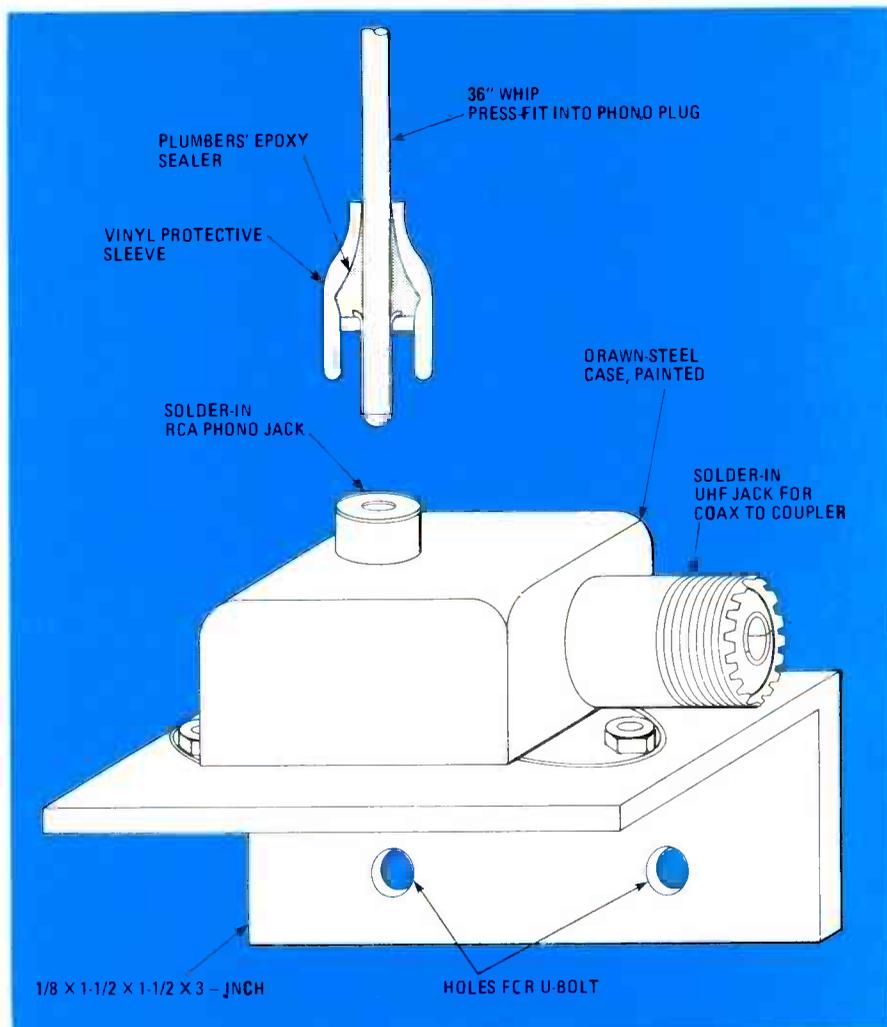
TO WEATHER-PROOF the case, seal all joints and drill a small bleed hole for drainage.
